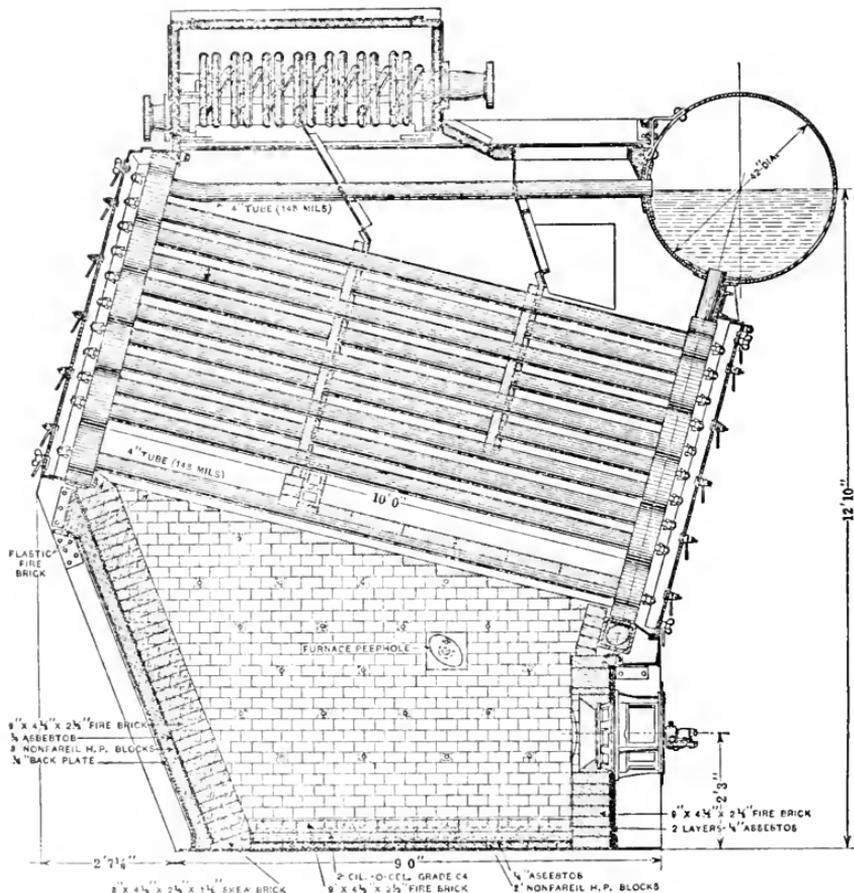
Sectional Side Elevation of Water Tube Marine Boiler, Showing Tubes, Steam and Hot Water Drum, Superheater, and One Oil Burner
